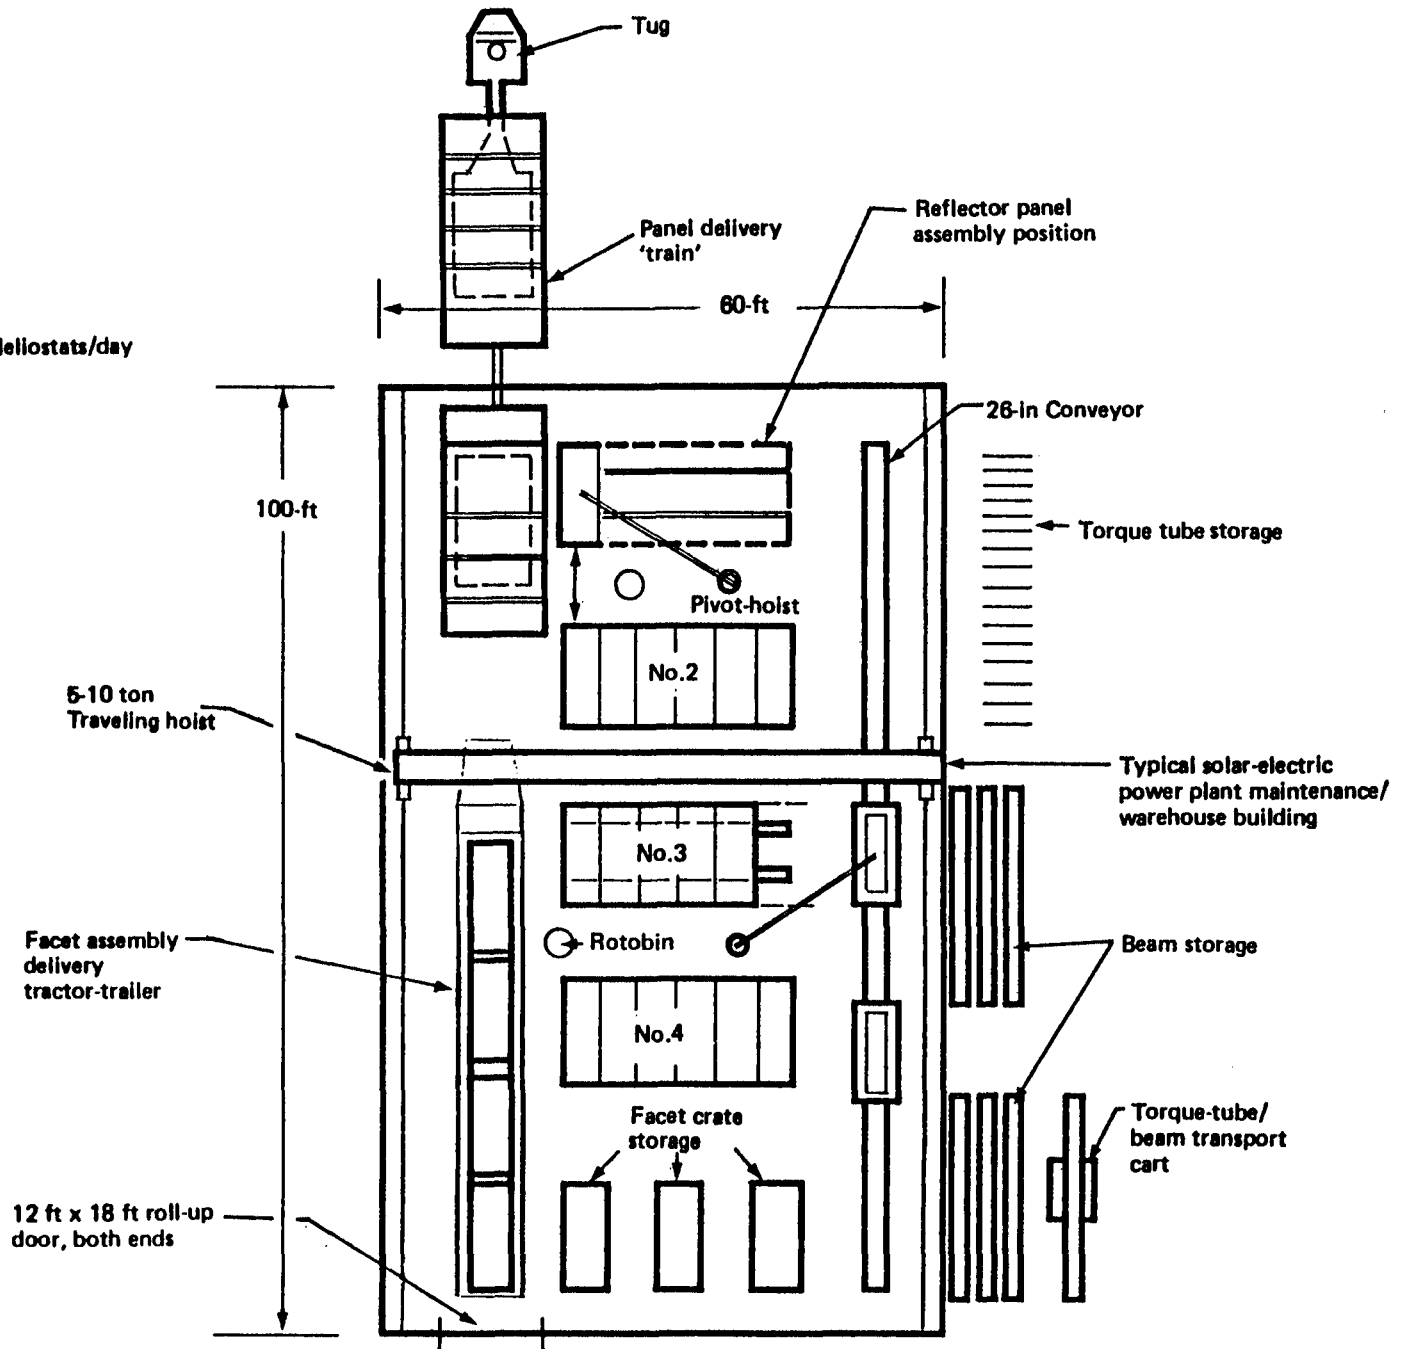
Site Assembly Building Layout for Reflector Panel Assembly
